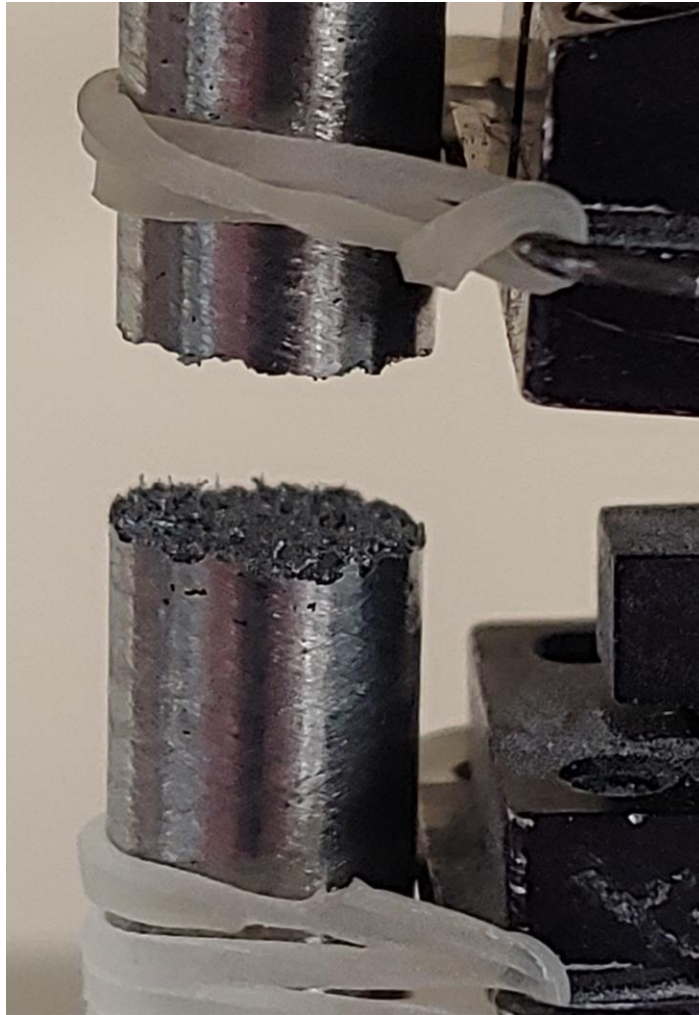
Focused Beam As-Built Brittle Failure
